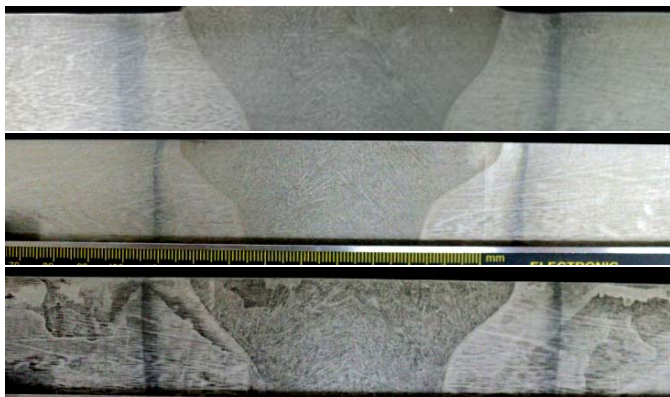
Thermite Weld Longitudinal Cross Section View of Railhead Top – Untreated Thermite Weld; Middle – Thermite Weld with Single Chill during Weld Pour; Bottom – Thermite Weld with Two Chills placed after Shearing
